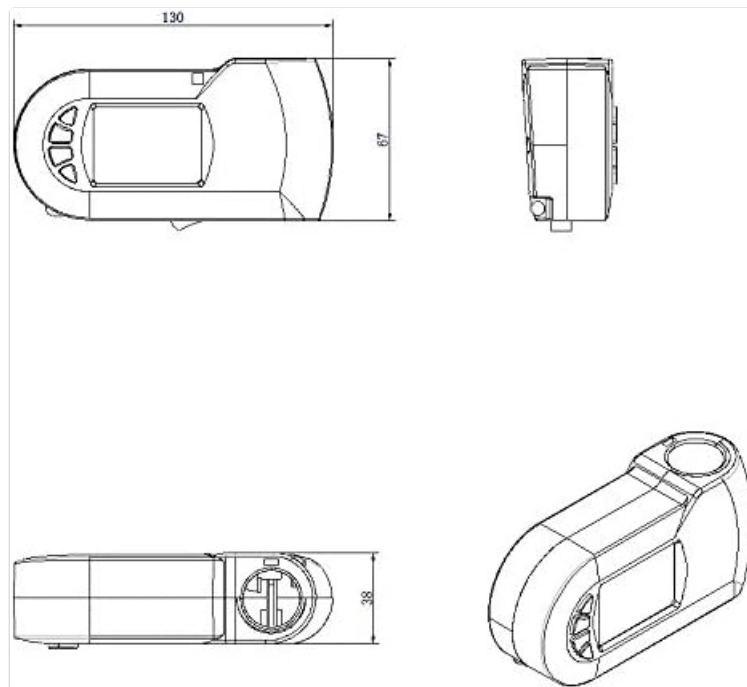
Technical drawing showing the top, side, and isometric views of the E700W digital thermostat unit, with key dimensions indicated in millimeters (e.g., 130mm length, 67mm height, 38mm depth).
